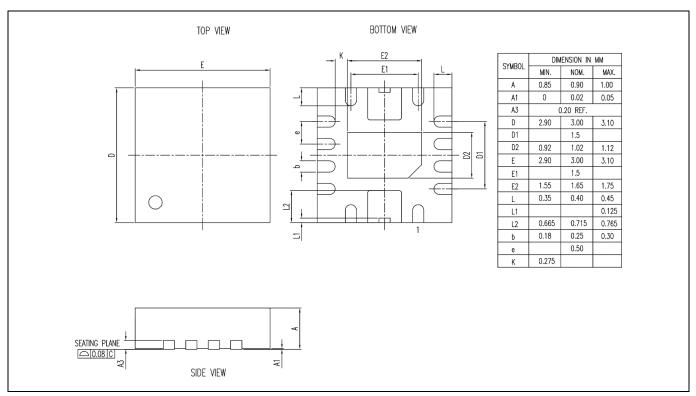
Outline Dimensions of QFN16, 3 mm × 3 mm, Pitch 0.5 mm
